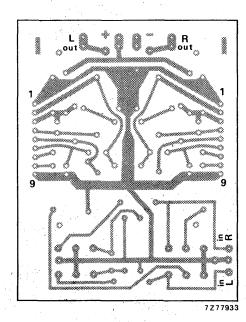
Track side of printed-circuit board used for the circuit of Fig. 12; p.c. board dimensions 83 mm x 65 mm.
